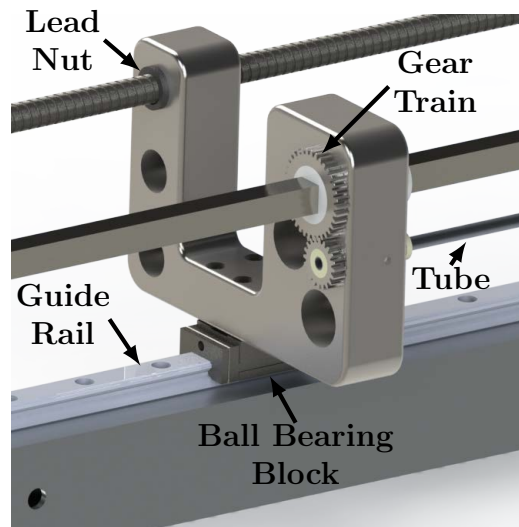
A detailed view of a single carrier is shown. Rotation of the square shaft transmits torque through the gear train and rotates the tube. Rotation of the lead screw translates the carrier on the guide rail which translates the tube.
